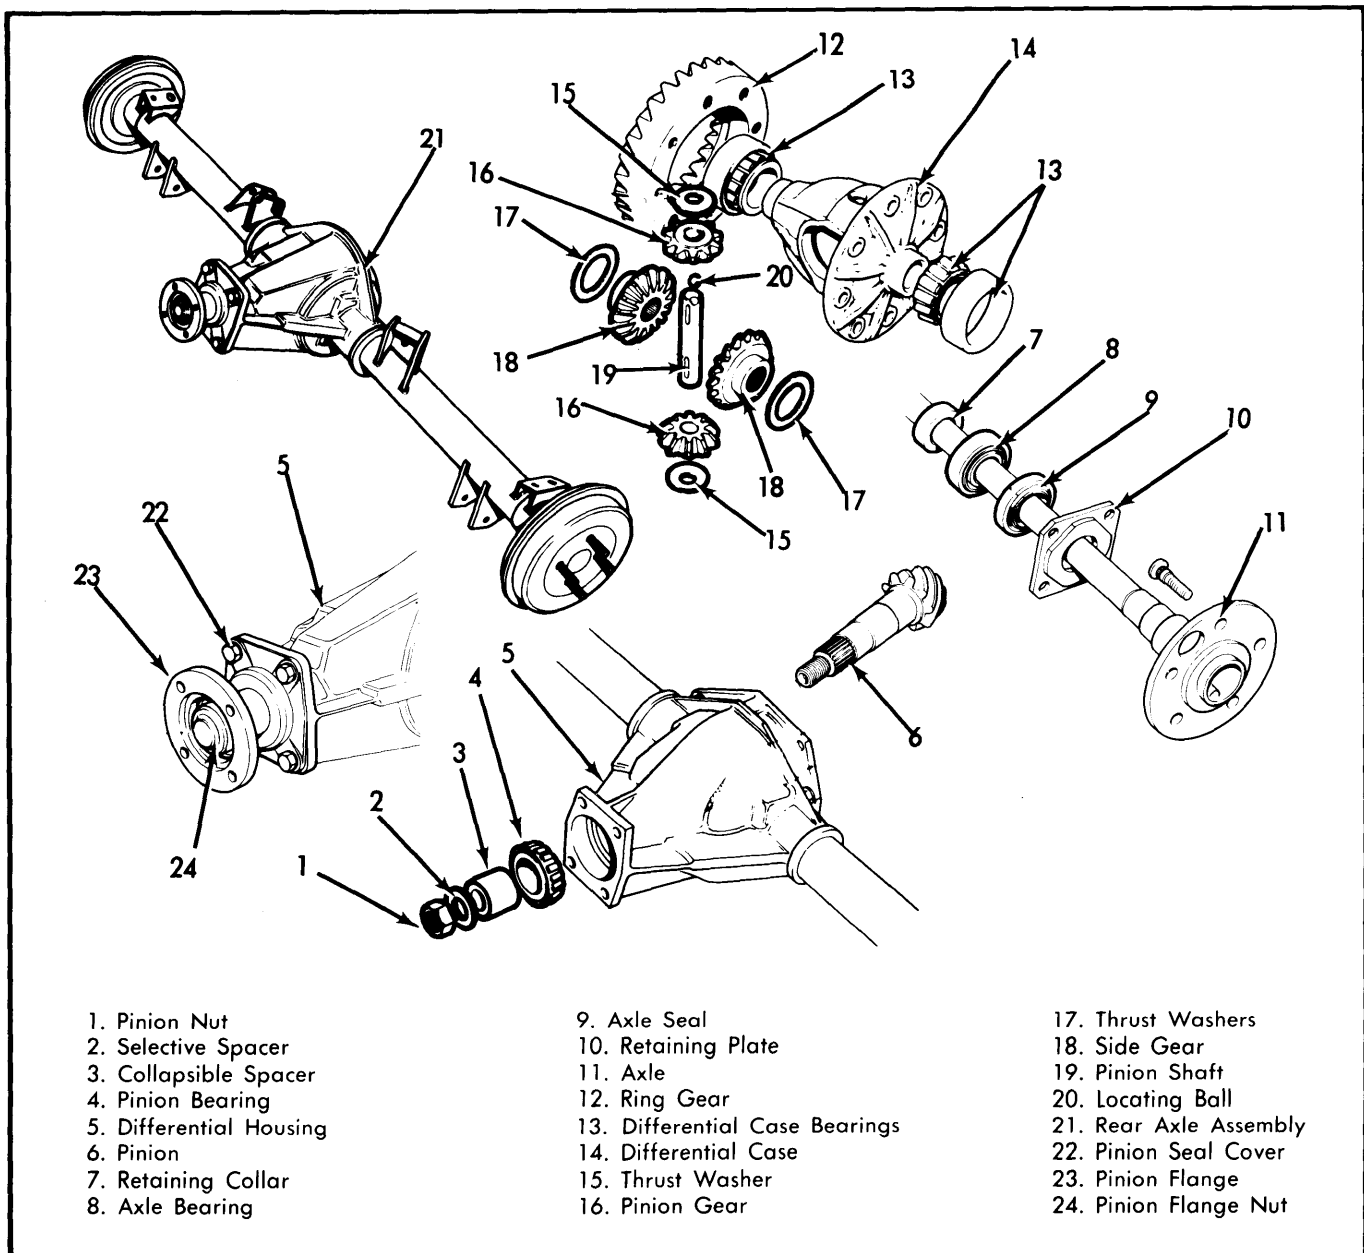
Exploded View of Triumph TR7 and TR8 Drive Axle Assembly
